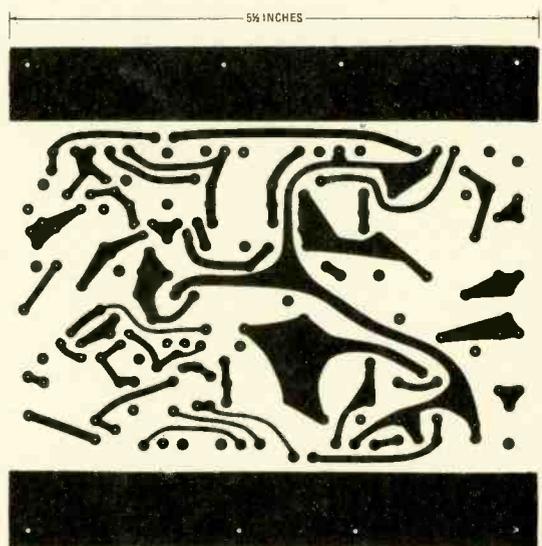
PATTERN for the foil on the bottom surface of the amplifier board.
